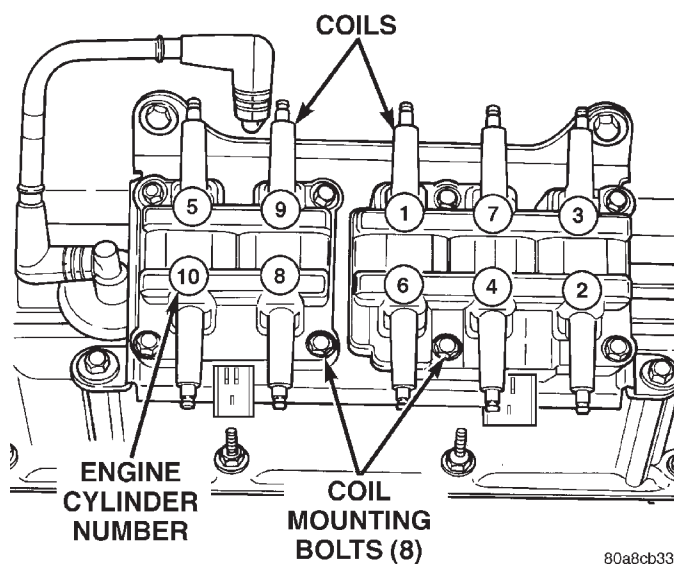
Ignition Coil Packs—8.0L V-10 Engine
